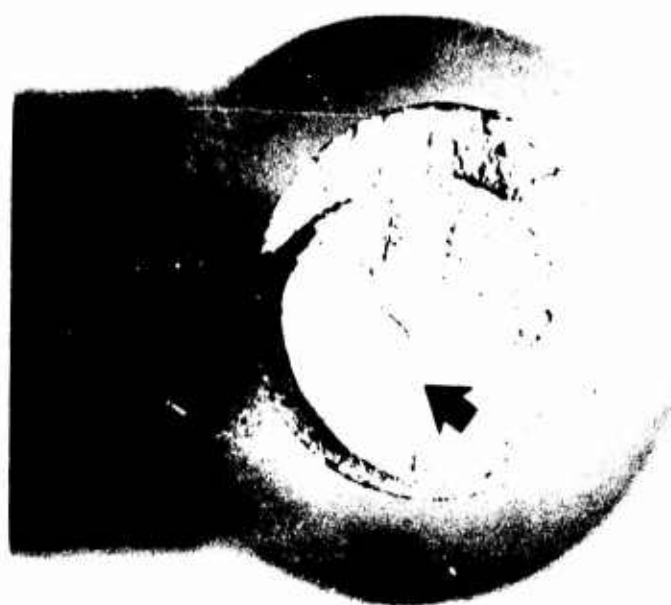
Fracture Surface of Unnotched Fatigue Specimen,
